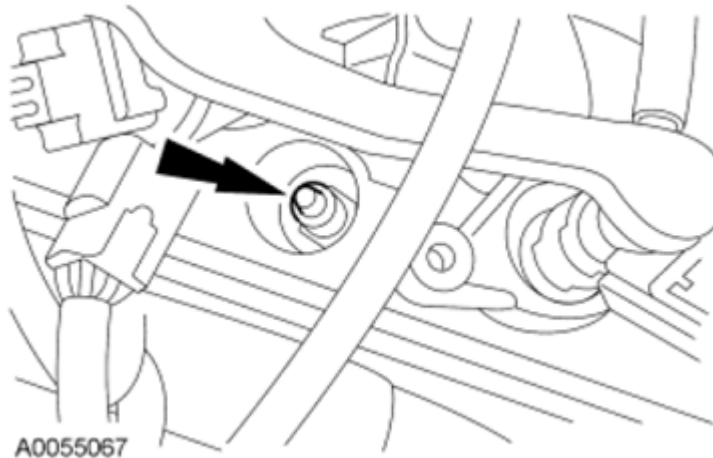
Locating Studs, Bolts And LH Valve Cover
